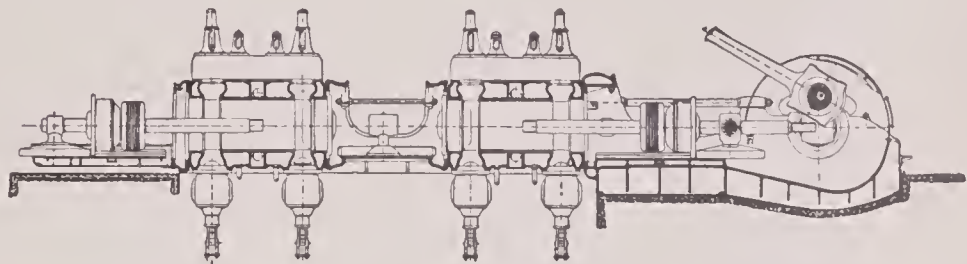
Taking the Pistons out of a Tandem Engine.
